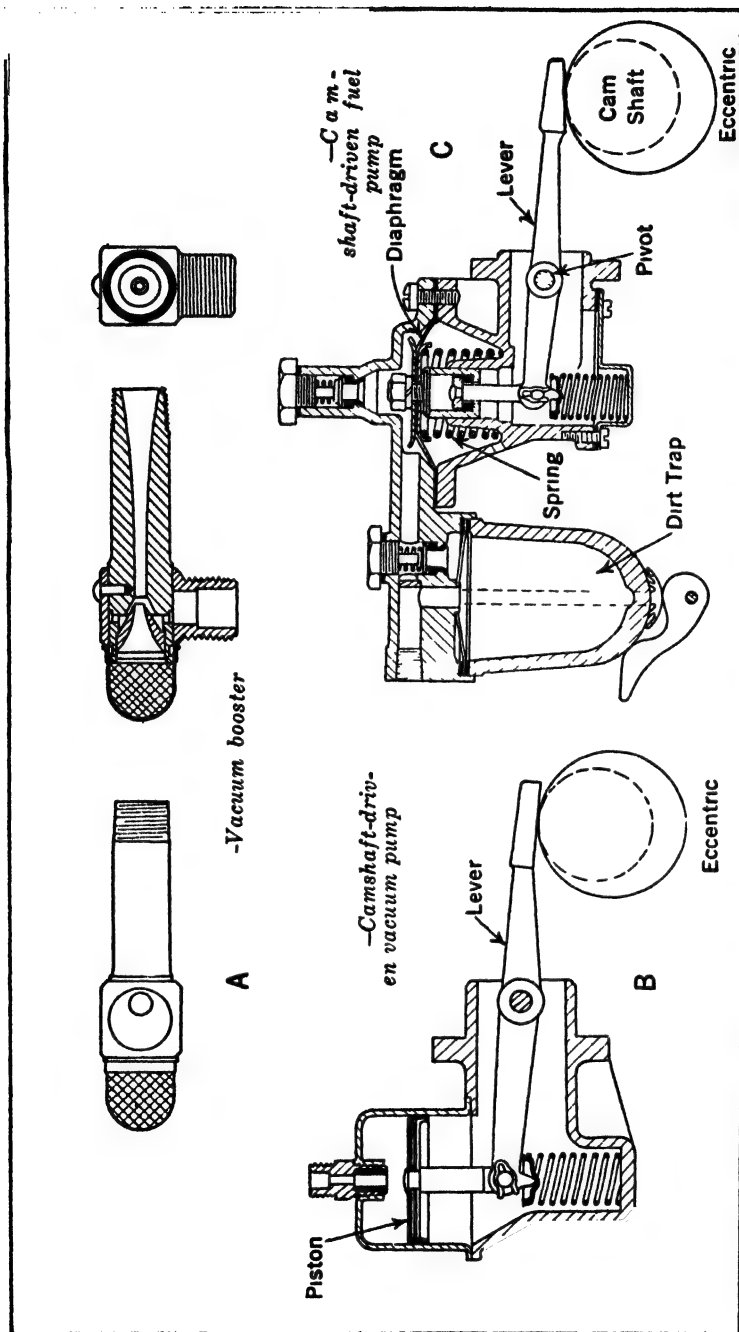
Recently Developed Devices for Fuel Feed. A—Vacuum Booster for Use with Stewart Vacuum Tank. B—Camshaft Driven Vacuum Pump to Supplement Manifold Suction when Vacuum Supply Tank is Used. C—Camshaft Driven Pump of Diaphragm Type Supplies Gasoline Directly from Main Tank to Carburetor.
